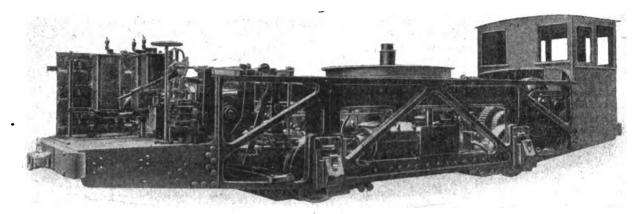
ELECTRIC LOCOMOTIVE, WITH COVERS AND ONE CAB REMOVED, SHOWING CONTROLLERS, &C.
